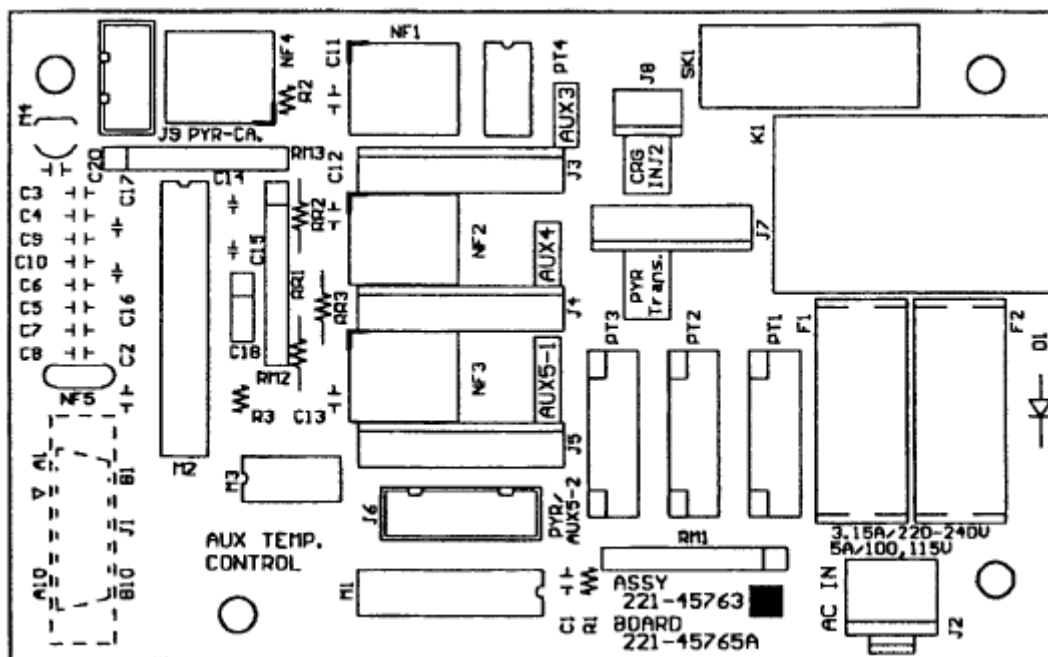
Assembly Diagram for PCB AUX TEMP
